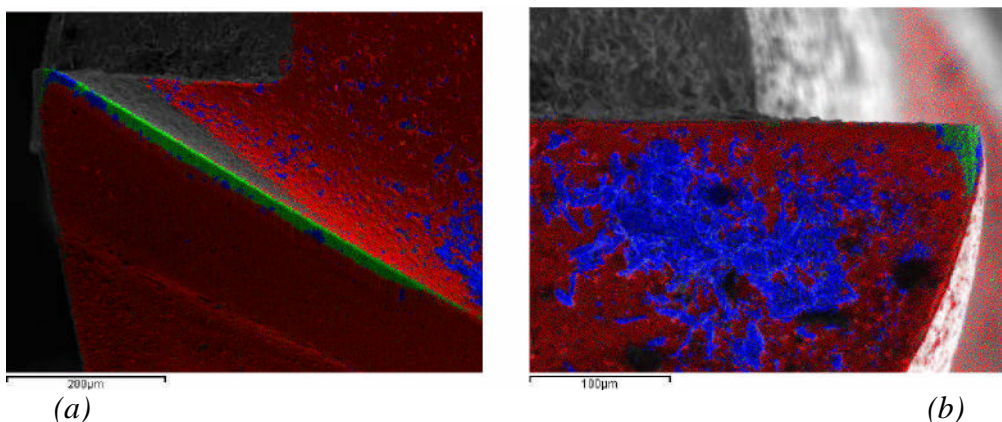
High magnification, false colour EDX of the cutting edges of a 1mm diameter WC endmill coated with 2µm of CrN/TiN after 10 cuts, (a) side view, (b) front view
